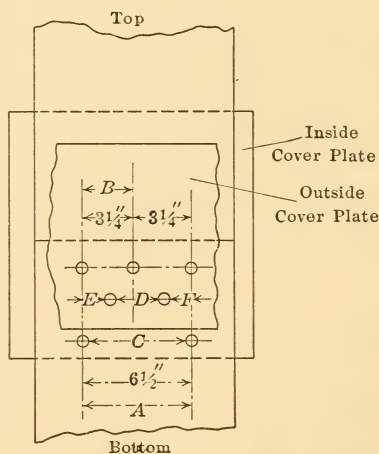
Diagram of triple-riveted double butt-strapped joint.
